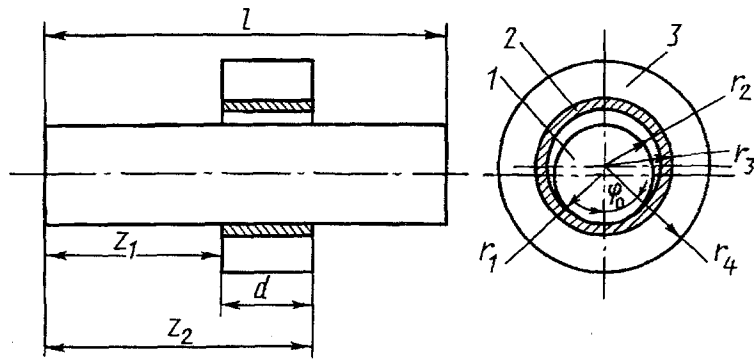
Design sketch of a friction element: 1) shaft; 2) bushing; 3) housing; φ_0 is the half-angle of contact of a shaft with a bushing.
